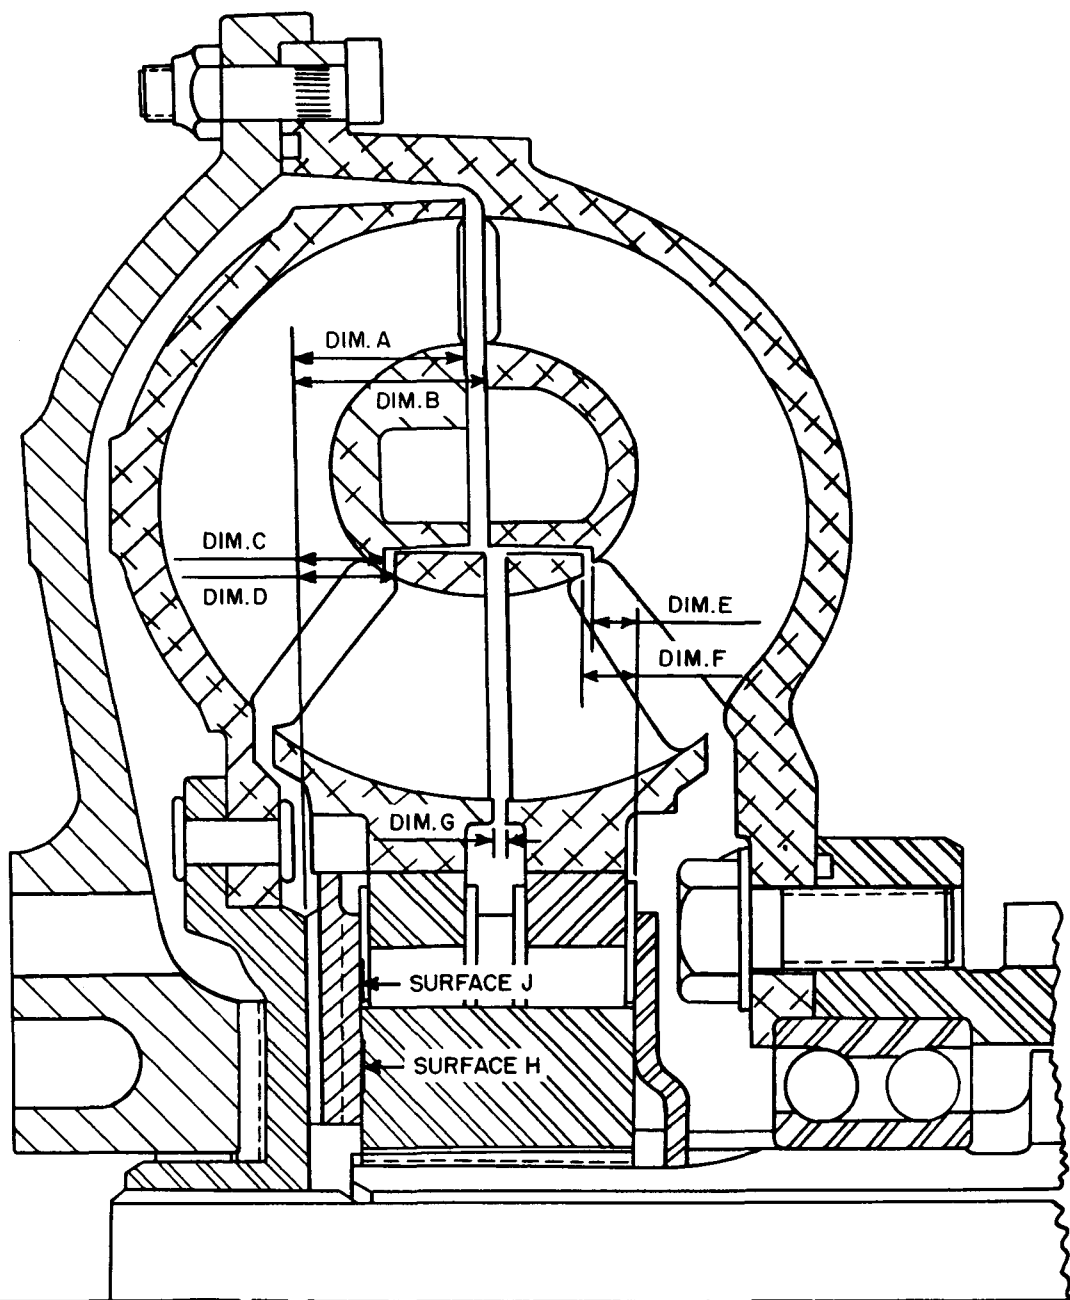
Model CRT-3330 Torqmatic converter cross section showing wear limits points of measurement.
